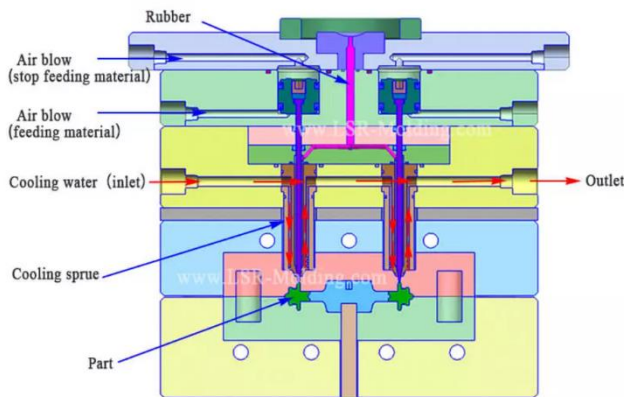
Mold assembly cross-section (Needle valve cold flow channel, n.d.)
